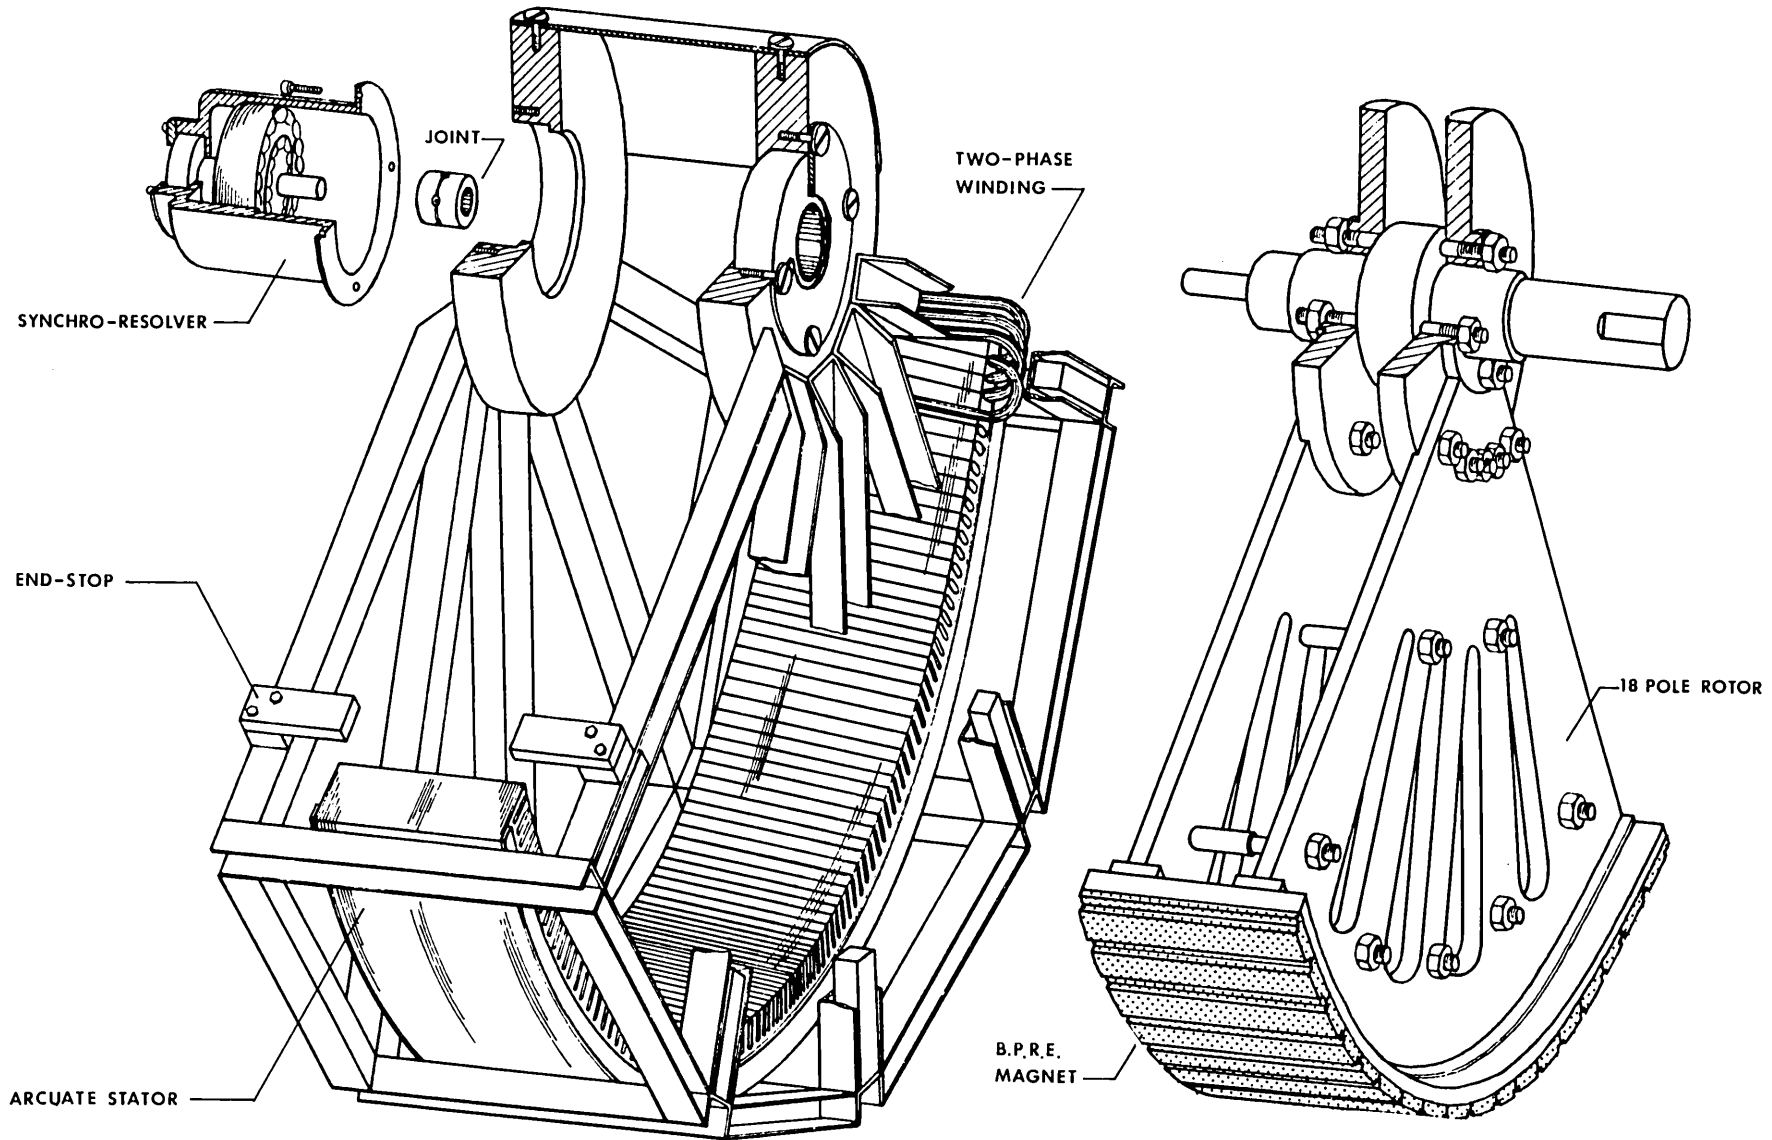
Exploded view of the limited motion rotary brushless actuator
